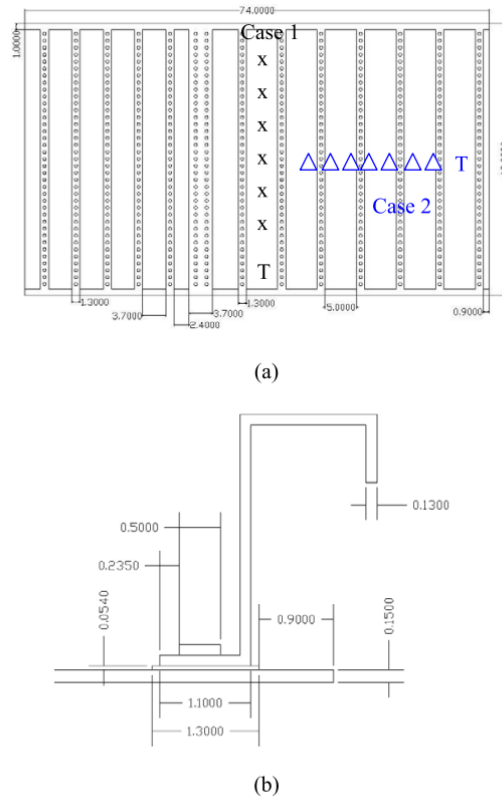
Wing skin structure: (a) sketch of the rivet row and angle beam transducer locations; (b) typical geometry of a stiffener riveted to the skin (all scales are in centimetres).
